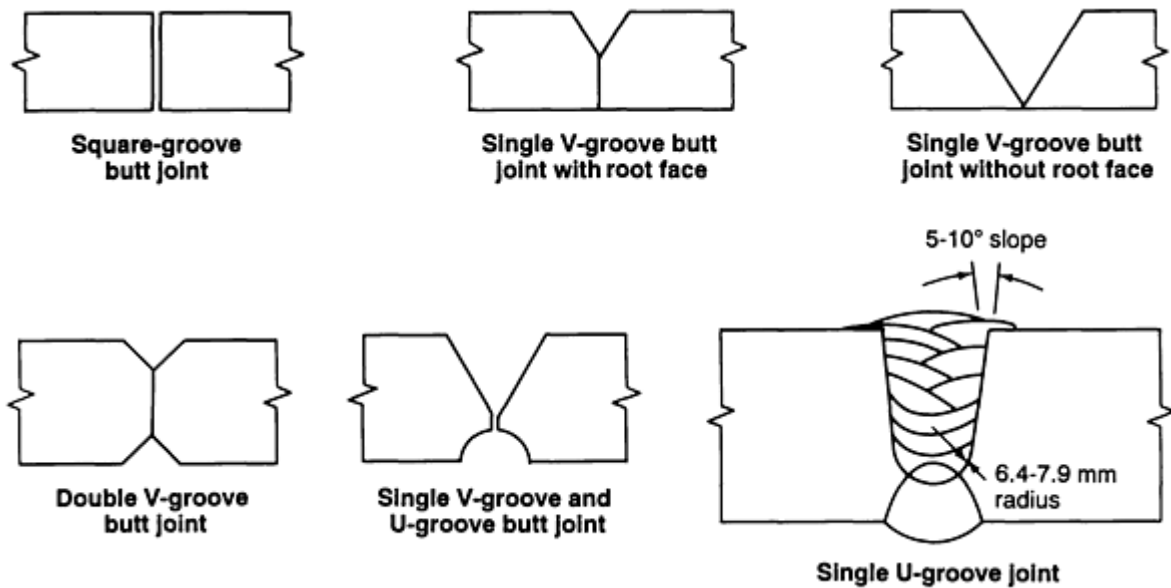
BUTT JOINT DESIGNS FOR SUBMERGED ARC WELDING. SOURCE: REF 26
